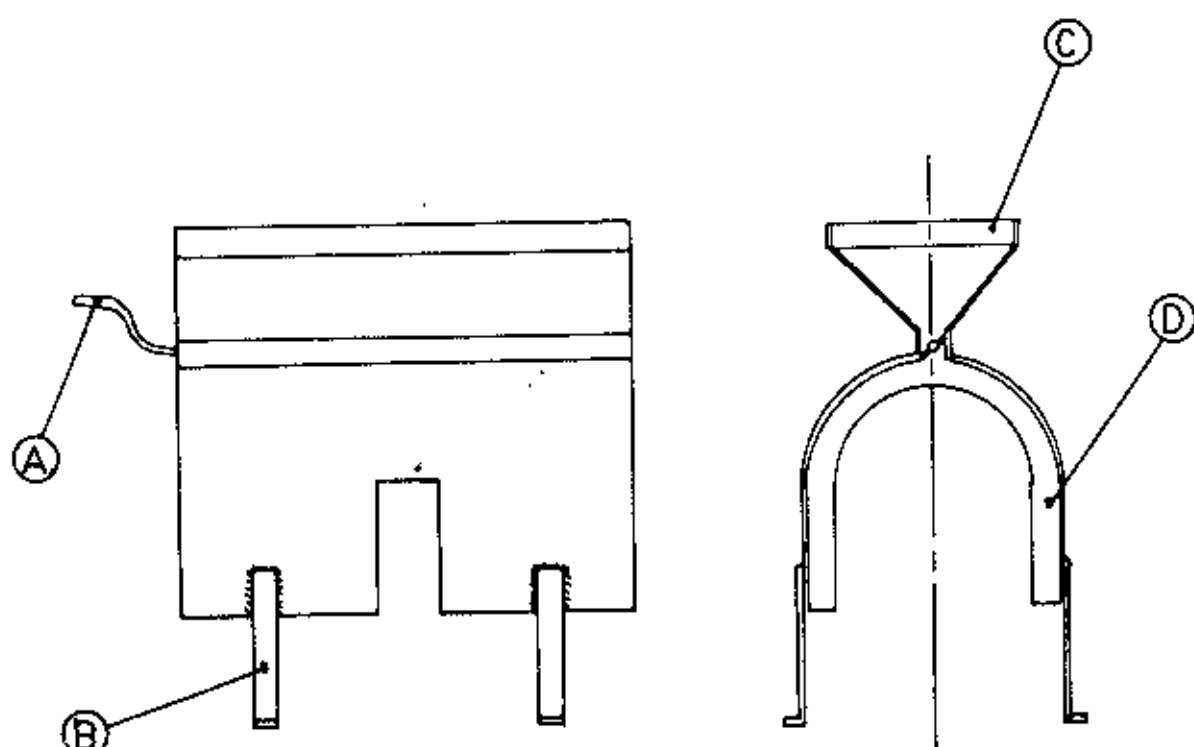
(a) CENTRIFUGAL CASTING MACHINE
